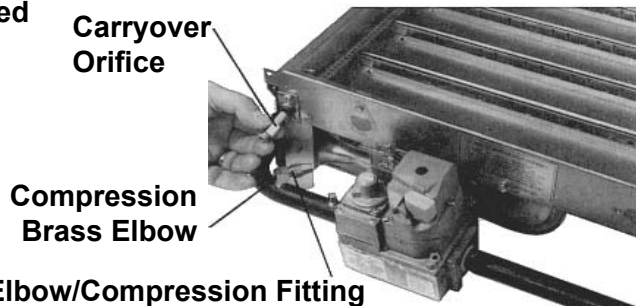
B - Burner Rack with Carryover Lighter Tube equipped with Carryover Regulator Used with Propane
